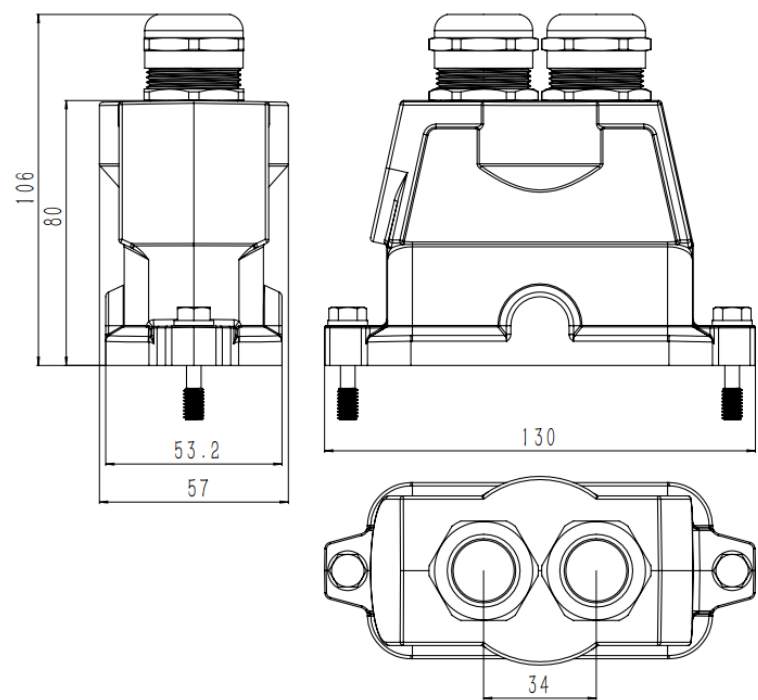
AIR6L-A manipulator end heavy-duty dimension drawing
